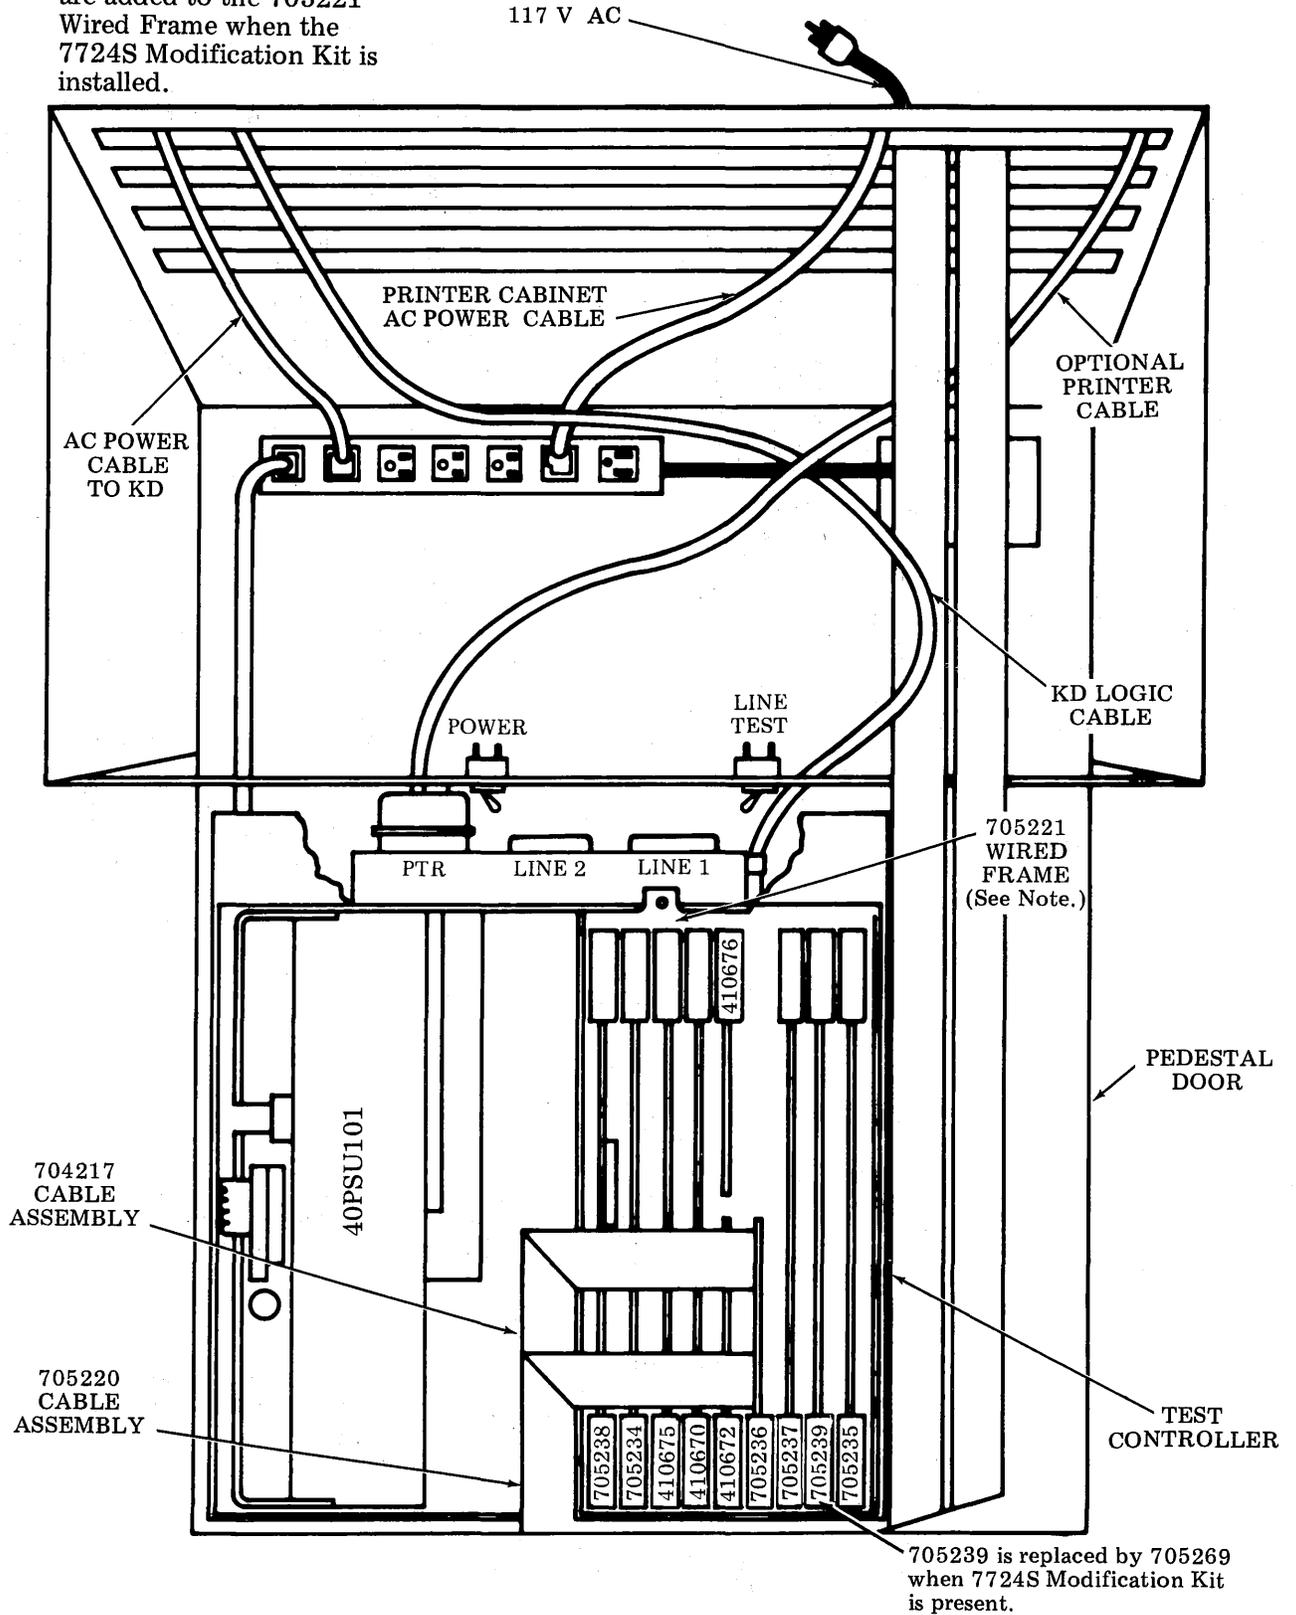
Controller Card Layout and Pedestal Cable Routing
